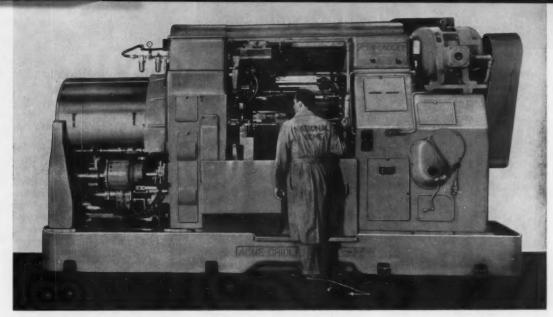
A 4-inch, eight-spindle bar automatic, one of the largest capacity production machines of this type
